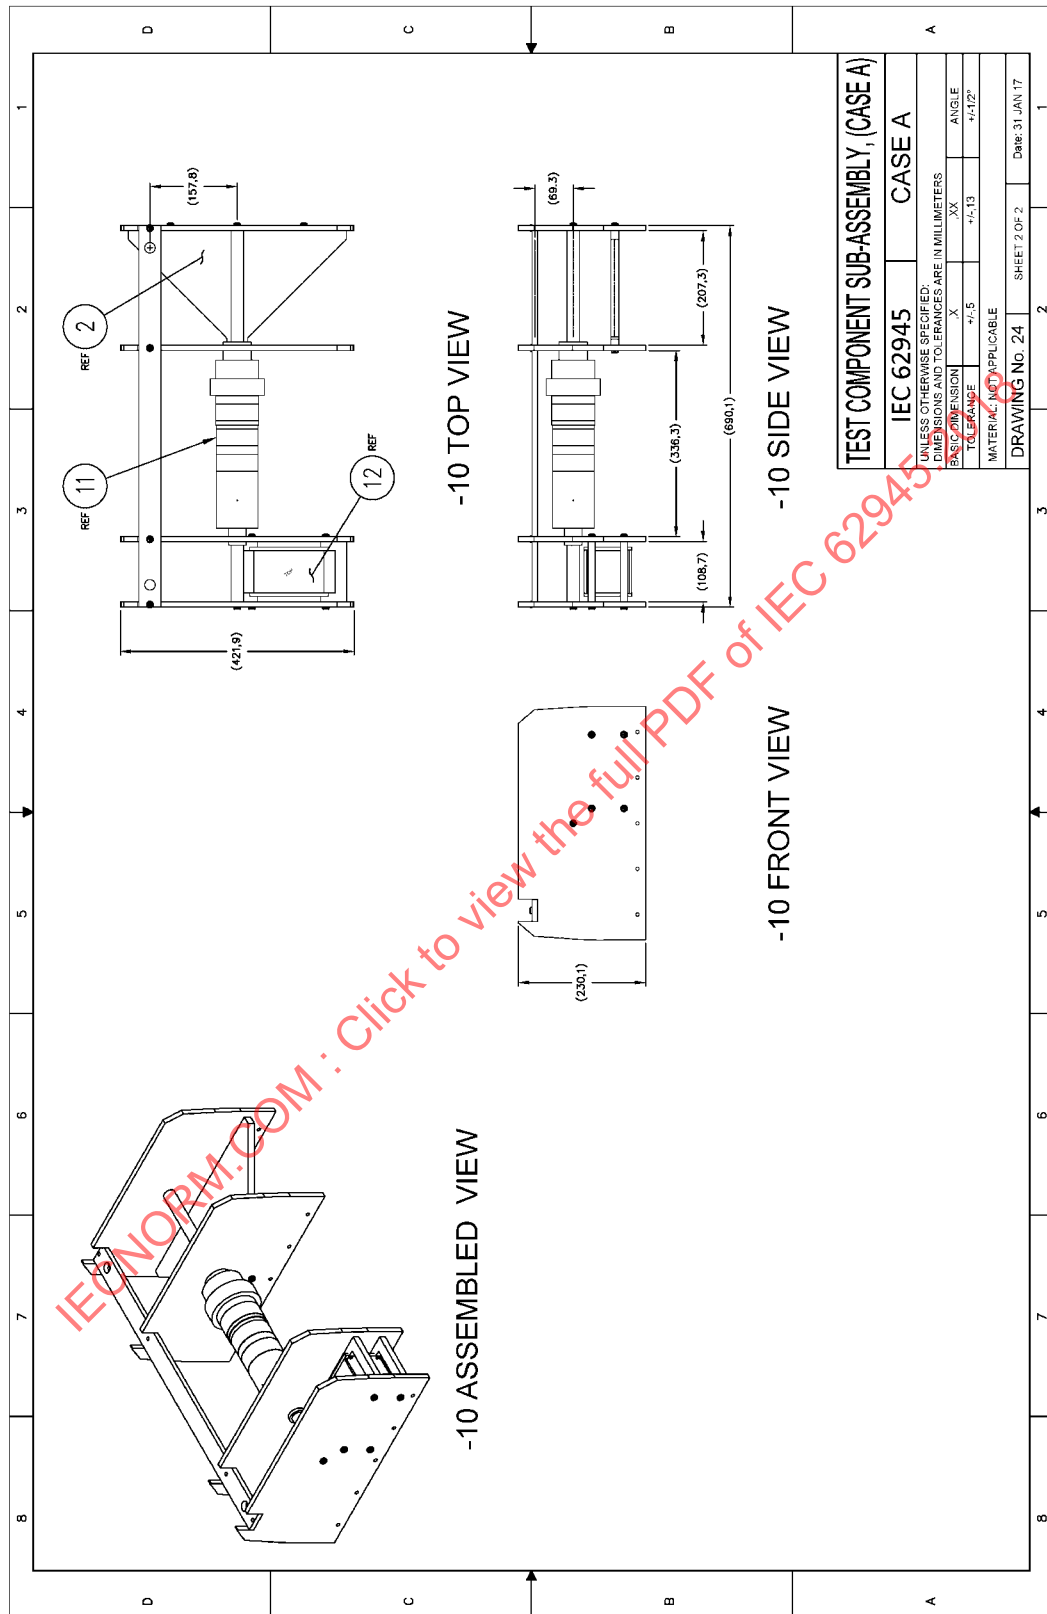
Test component sub-assembly of Case A test article (drawing 1 of 2)
